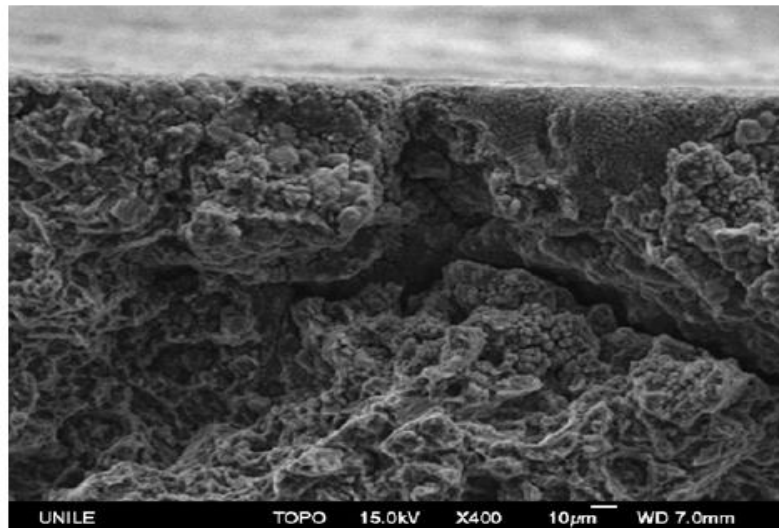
fracture plane of AZ91 which indicate the onset of fatigue fracture crack via surface hole [22].
